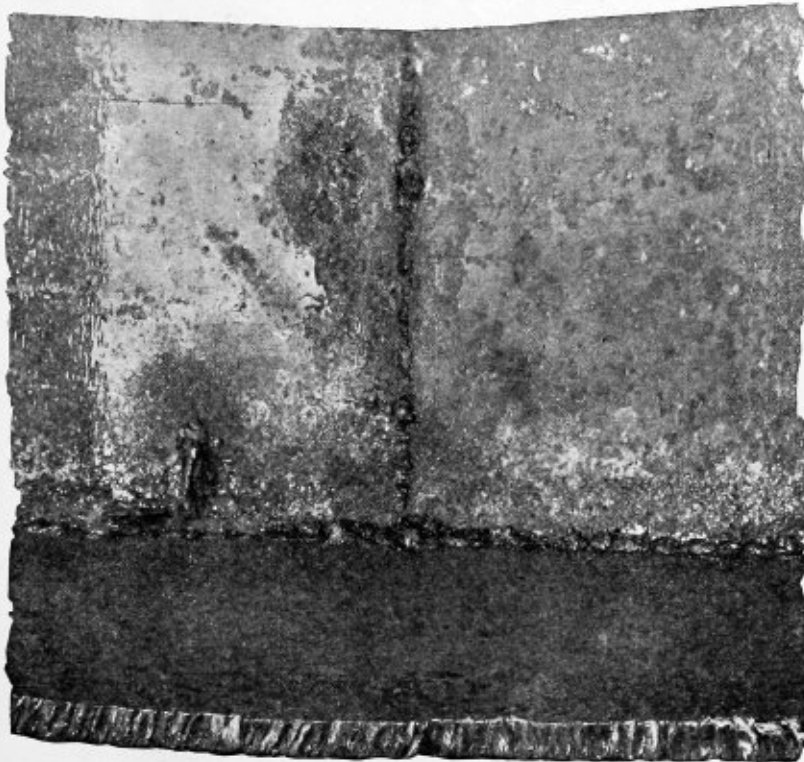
Welding of Head to Shell. Note the Rough Character of the Work
